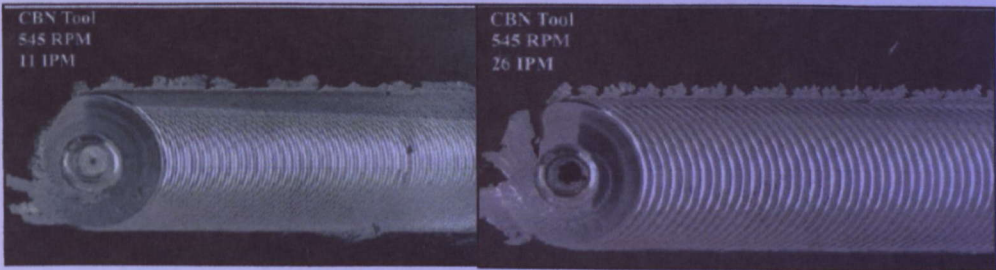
FSW using CBN welding tool with different parameters [7]
